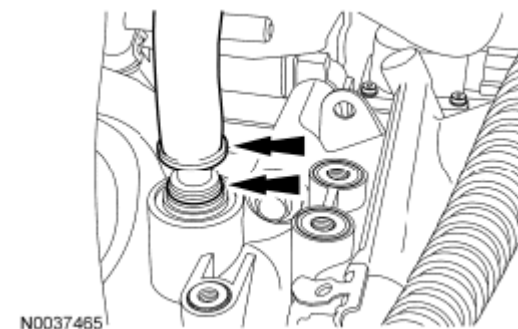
Locating Brake Booster Vacuum Supply Tube & Locking Ring
